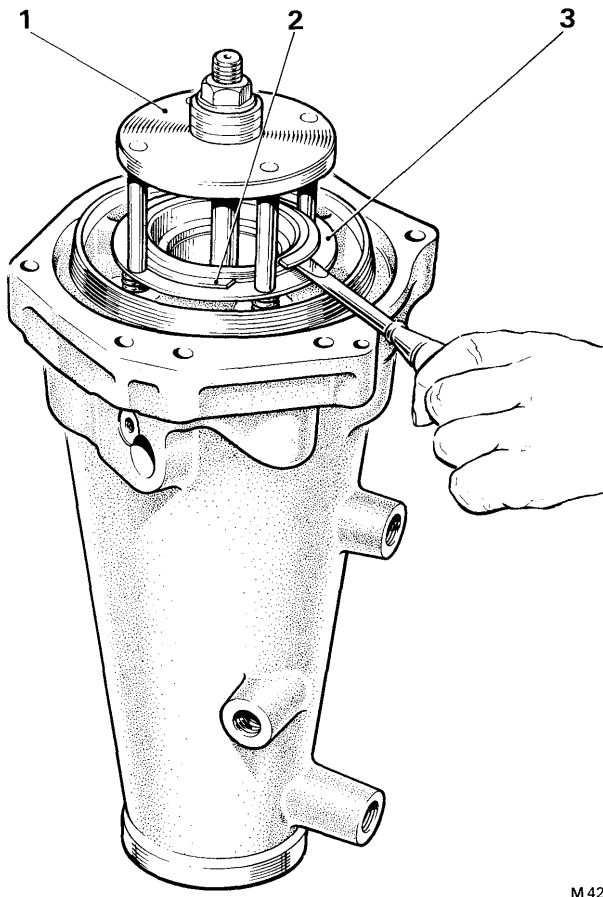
CLUTCH SPRING COMPRESSING TOOL IN POSITION
